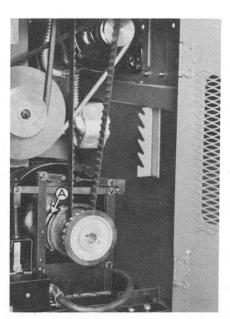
View of direct drive motor, positive drive belt, toothed drive pulley and solenoid-operated brake (A).
